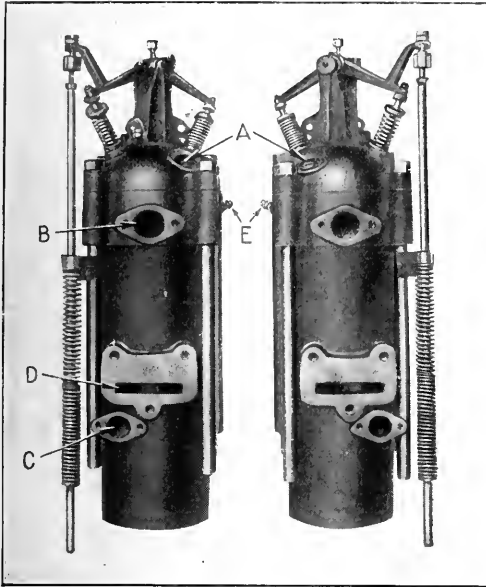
SHOWING CYLINDER CONSTRUCTION
